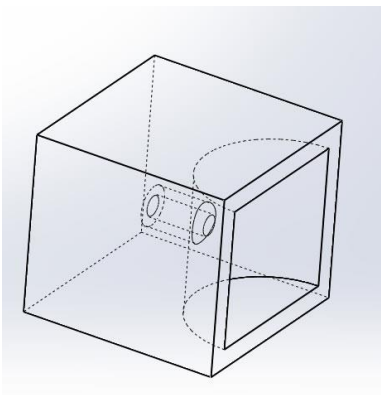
PEEK left mold. Dimensions of previous mold increased by 1mm.
